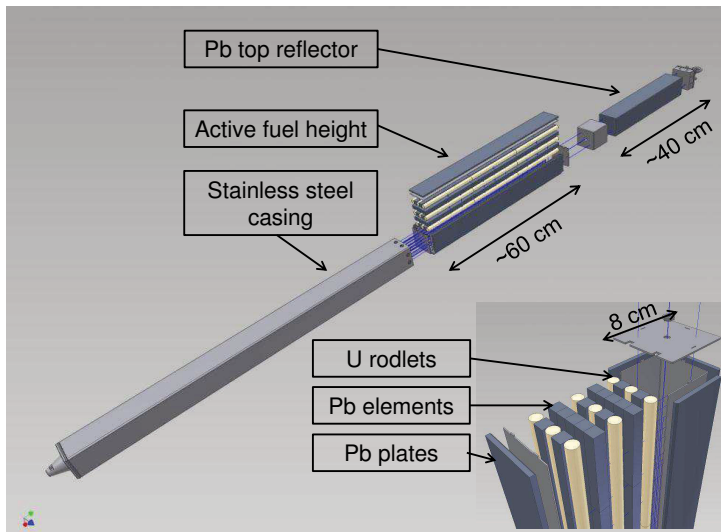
The VENUS-F fuel assembly design ©SCK•CEN.
